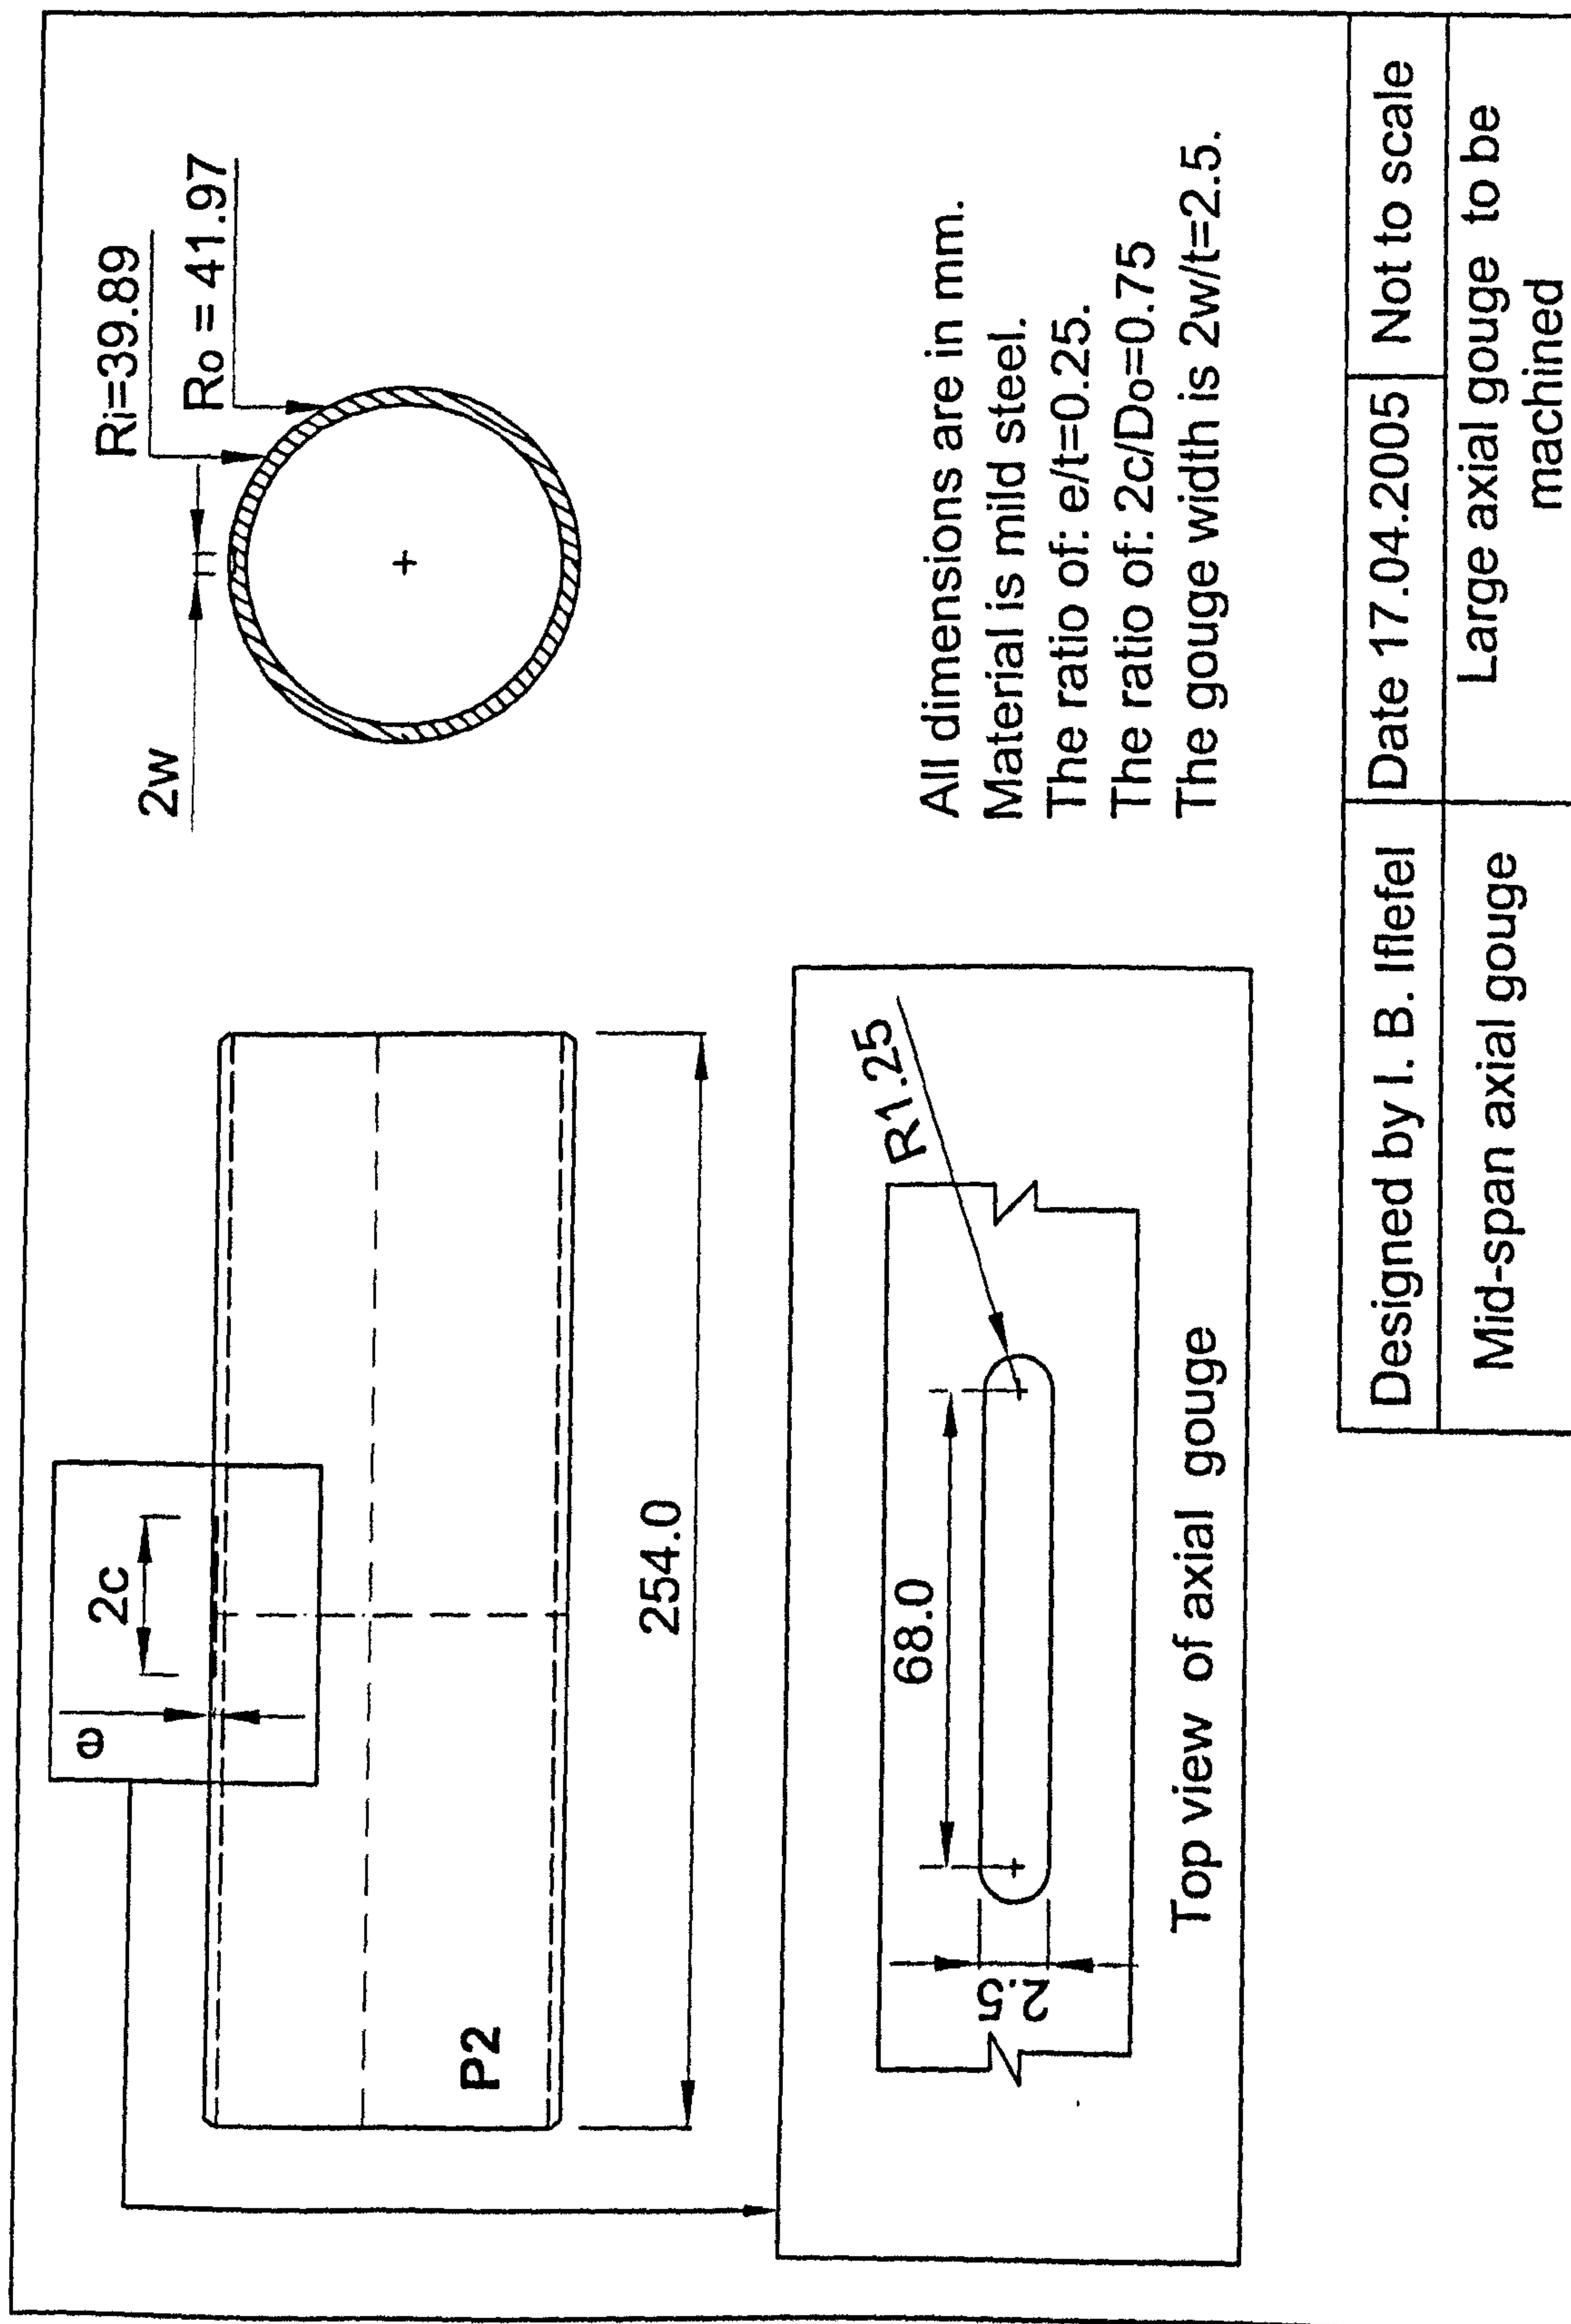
Sketch of the machined axial gouge at mid-span created by using lathe machine (in part P2 of model SP6).
